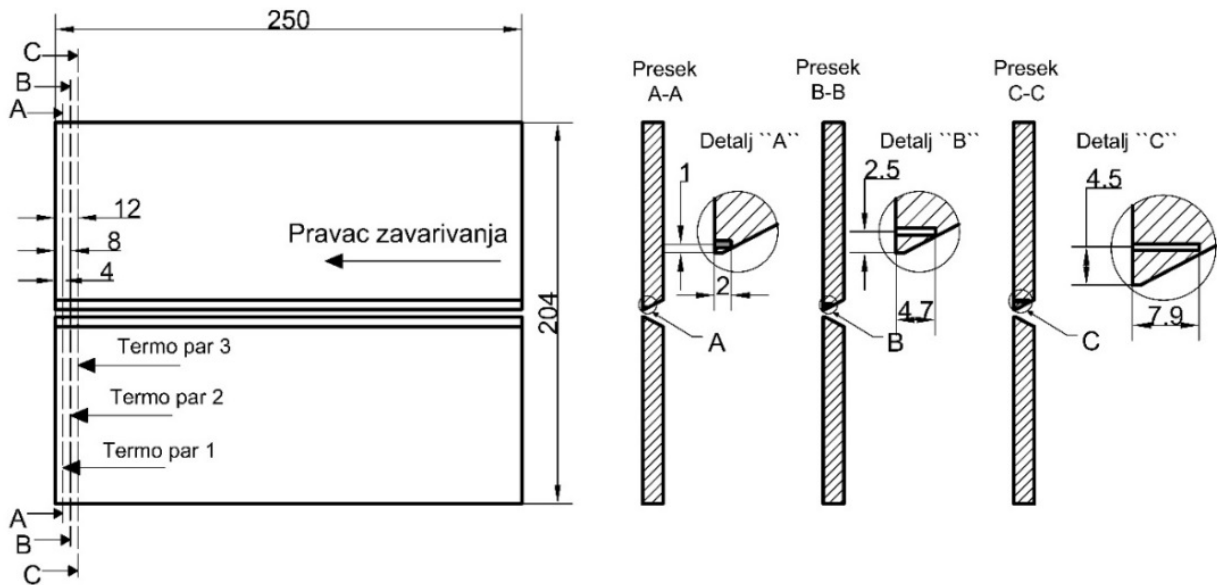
Thermocouple placement relative to the welding direction [1.2].
